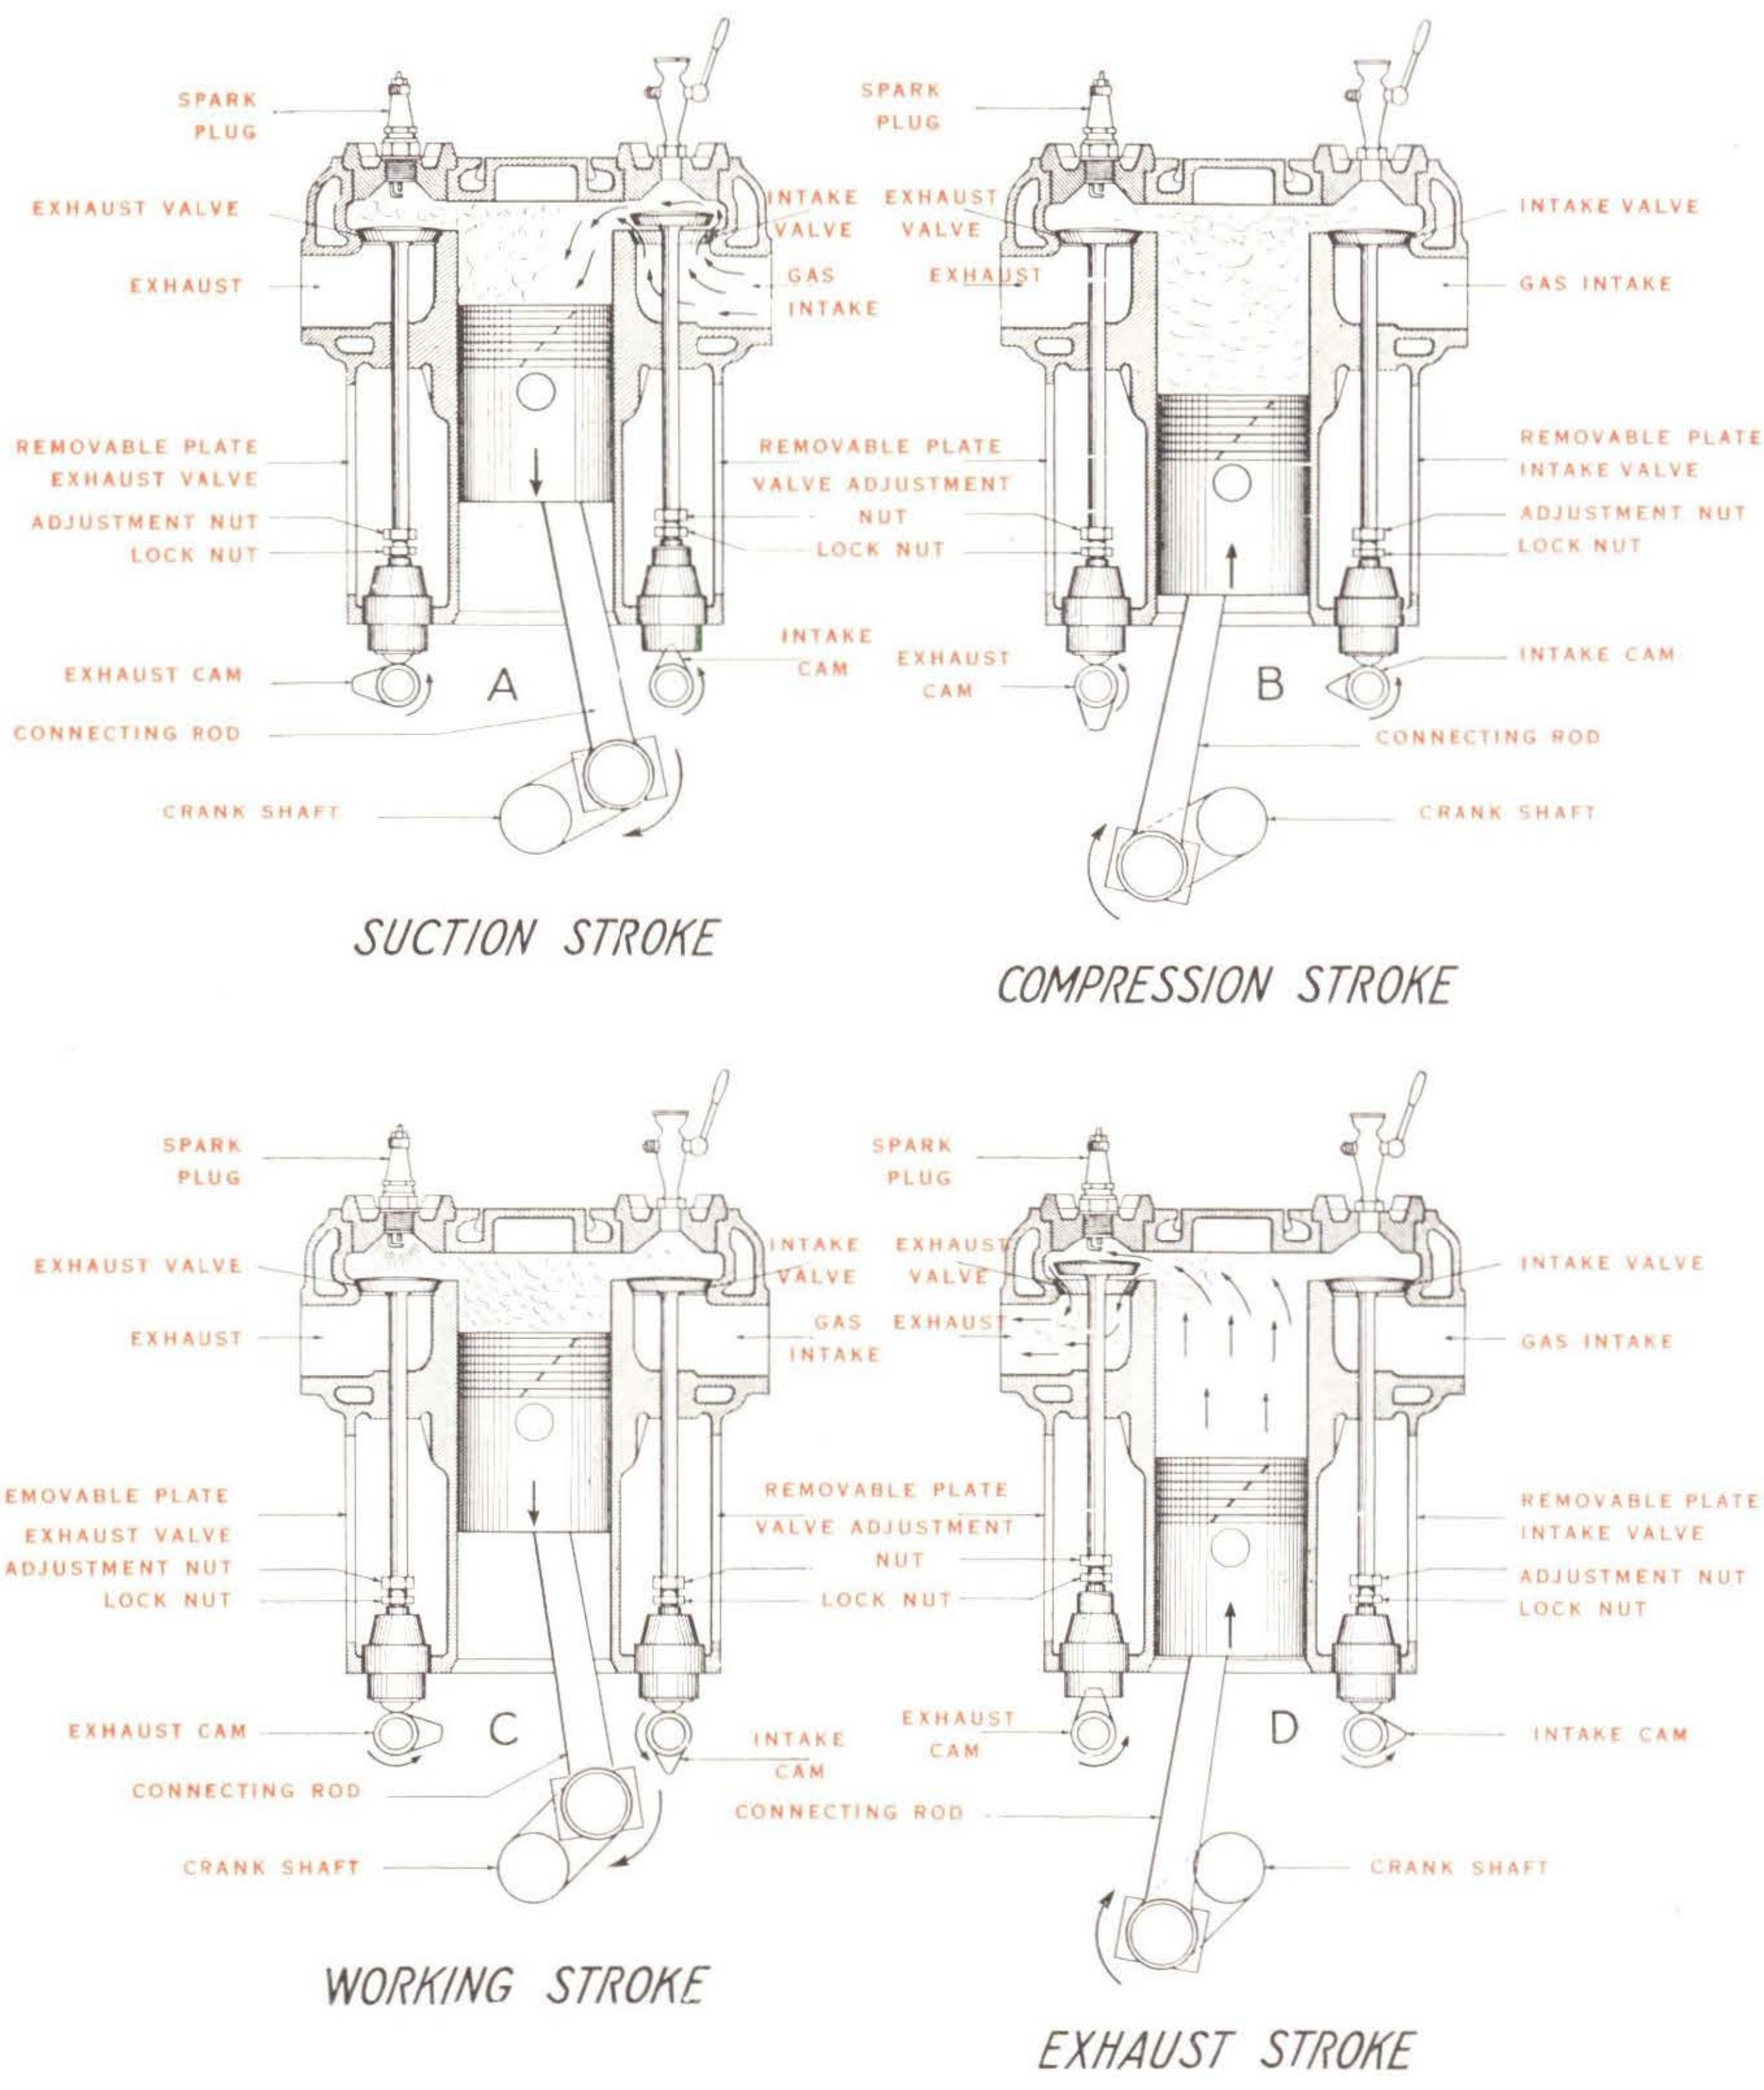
Diagram of the Strokes of a Four-Cycle Motor ("T" head Type). Water Jacket, Valve Springs and Other Motor Details are Not Shown in this Diagram
